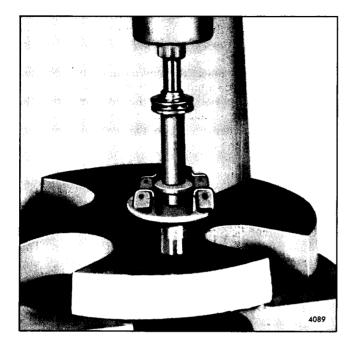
Installing Weight Carrier on Shaft using Tool J 8984
